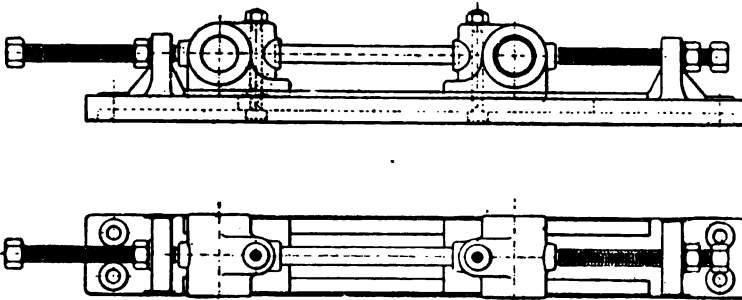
Type of Tightening Gear for Conveyors with Spur Gears.
